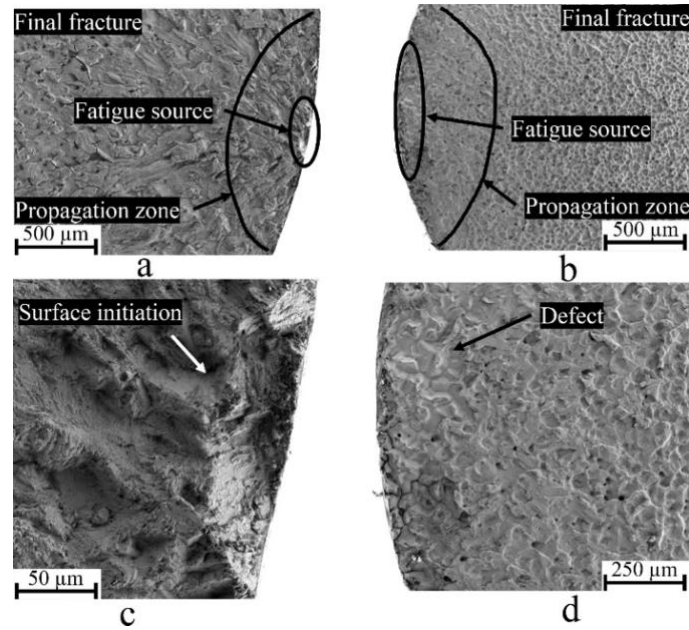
Fracture surfaces of (a) defect-free and (b) defect-bearing joints; (c) enlarged view of (a) fatigue crack initiated from the sample surface; (d) enlarged view of (b) fatigue crack initiated from the joint defect. Both samples are from batch 7 (OPS)
